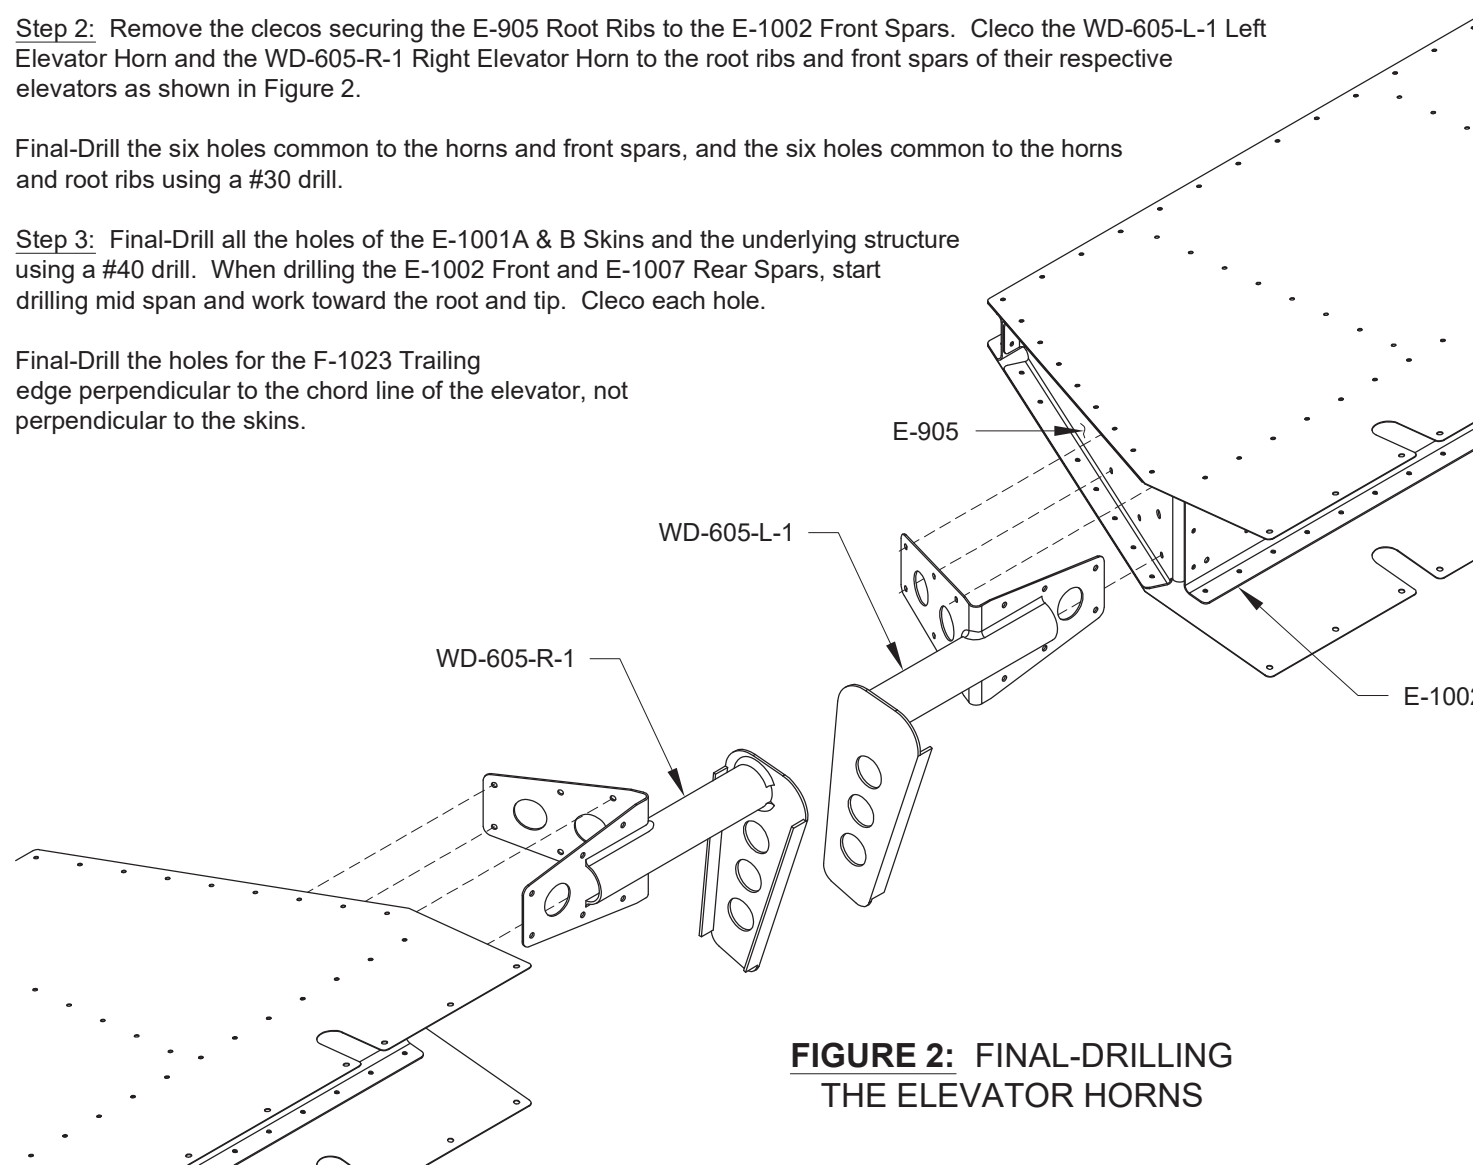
FINAL-DRILLING THE ELEVATOR HORNS
